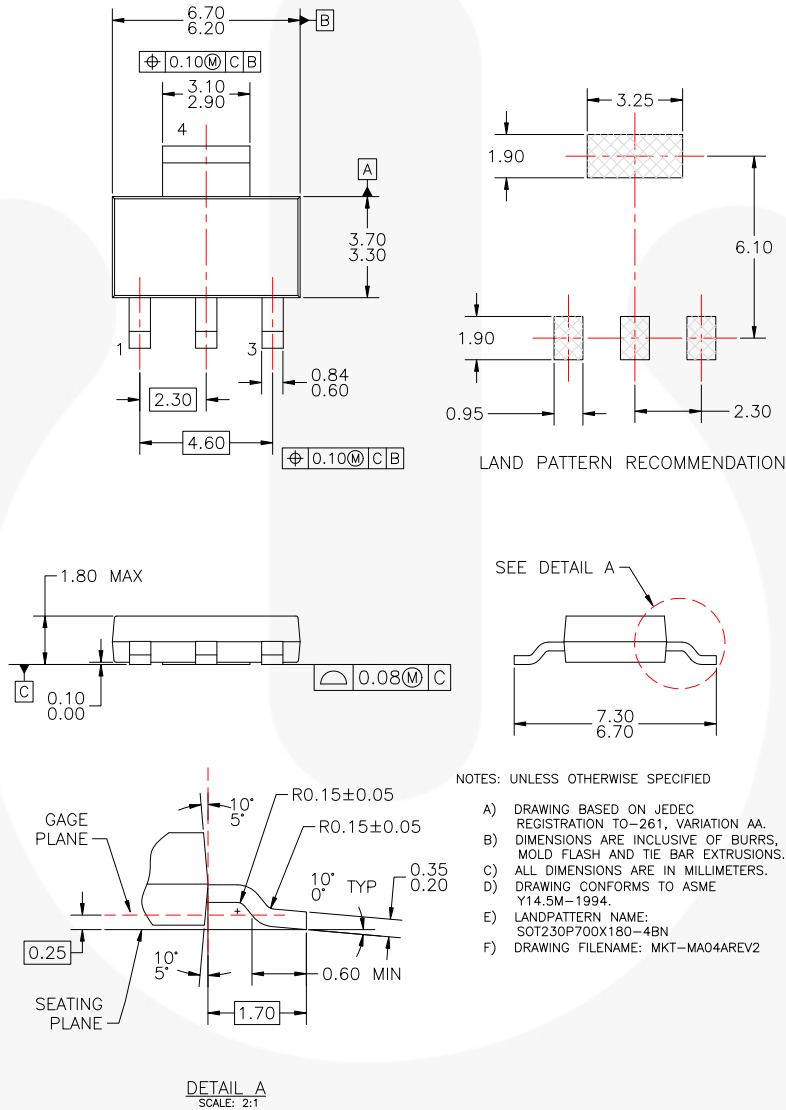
MOLDED PACKAGING, SOT-223, 4-LEAD (ACTIVE)
